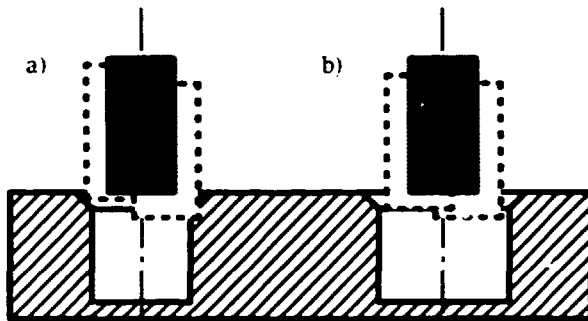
a) tight tolerance and bad accuracy causes contact forces.
